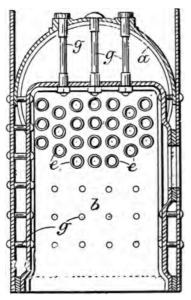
Mann heavy-freight steam vehicles. Transverse section of boiler.
